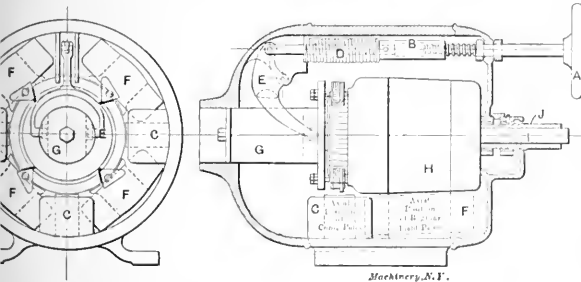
Section of Lincoln Motor, showing Armature Shifting Mechanism.
